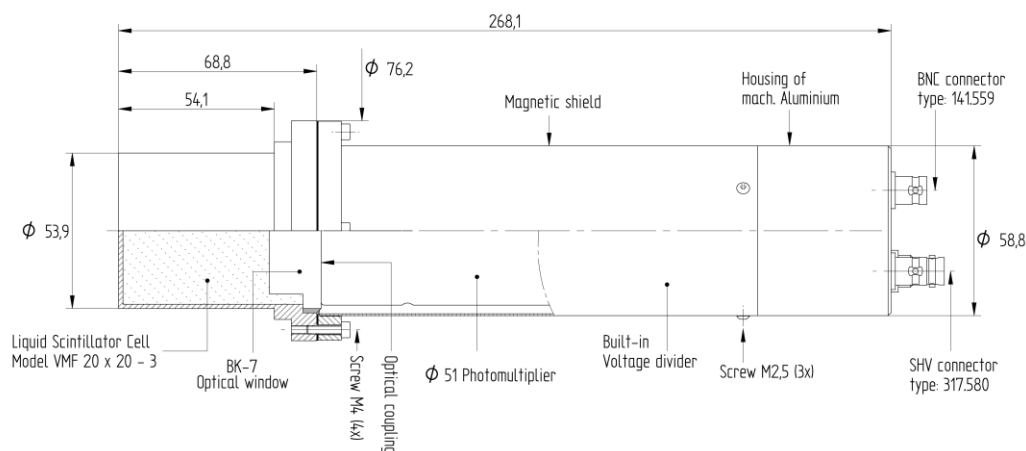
Mechanical layout of the detachable scintillator cell and PMT housing (dimensions in mm), reproduced from Scionix technical files.
